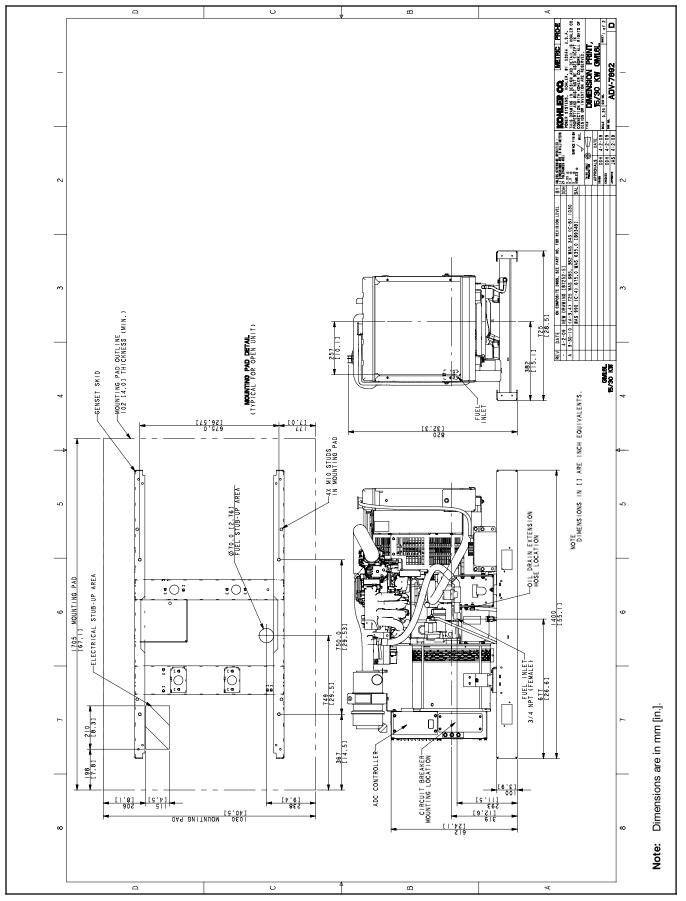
Dimension Drawing, ADV-7692, Sheet 1, Generator Set
